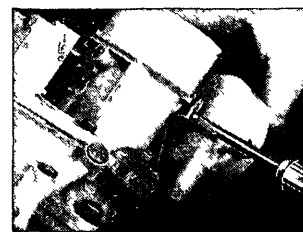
Hold choke valve wide open, then tighten choke lever screw
